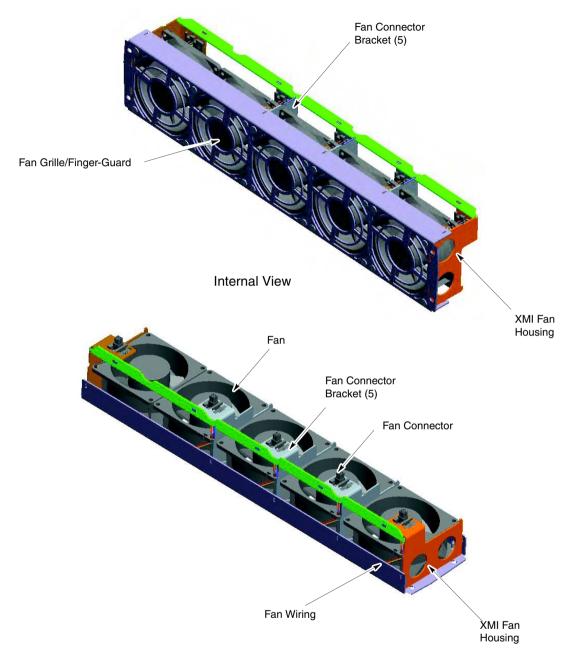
XMI Fan Tray Assembly (External & Internal Views)
